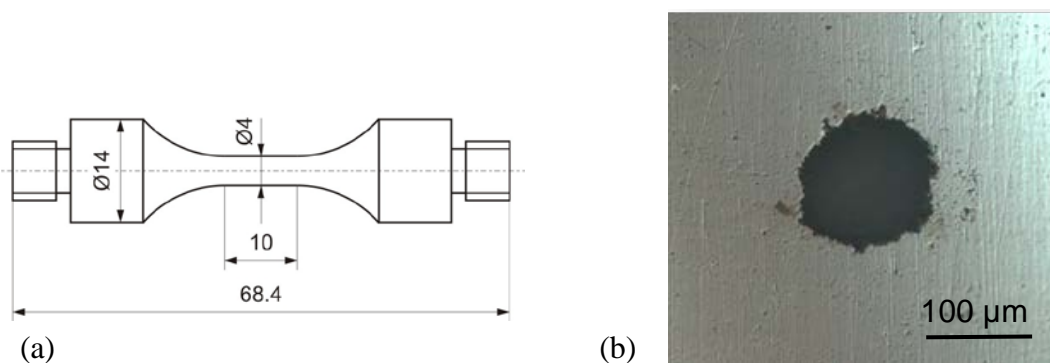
Specimen shape for fatigue life tests (a) and corrosion pit in the gauge lengths of the specimen (b)
